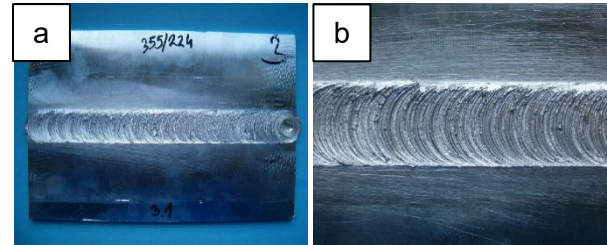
FSW joint made of WE43 casting alloy: a) view of the weld face, b) weld face with visible friction welding lines
